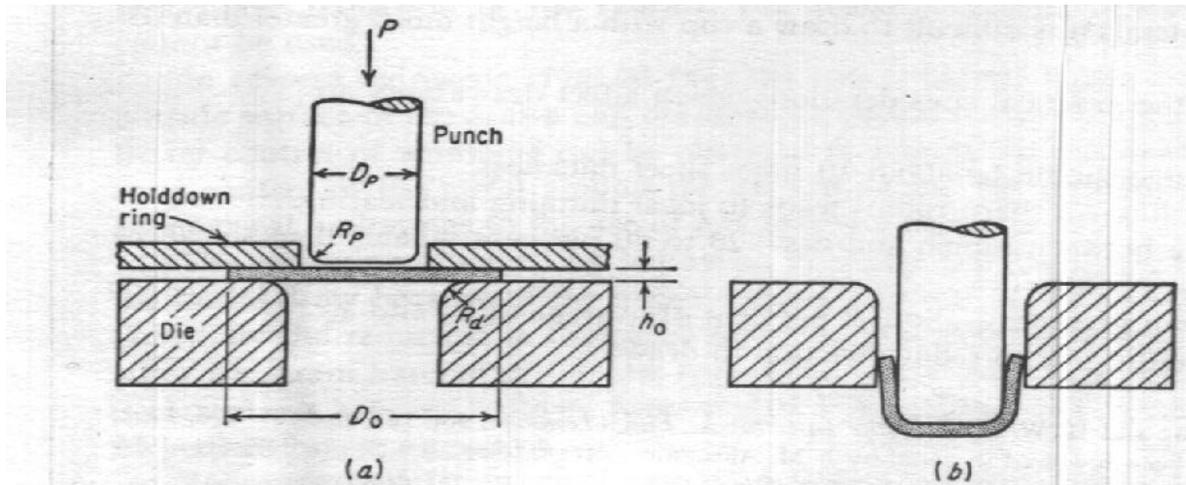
Deep drawing of a cylindrical cup (a) before drawing and (b) after drawing [1]
